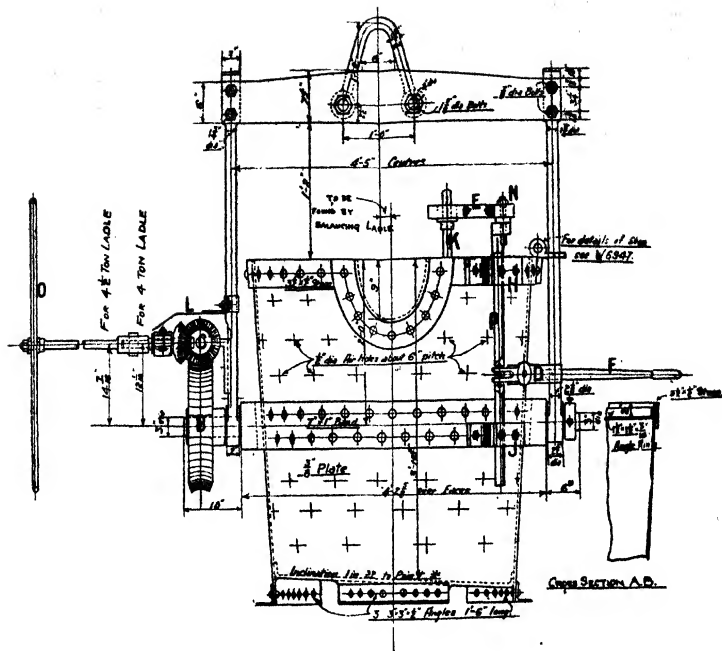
SECTIONAL VIEW AND PLAN OF FOUNDRY LADLE,
